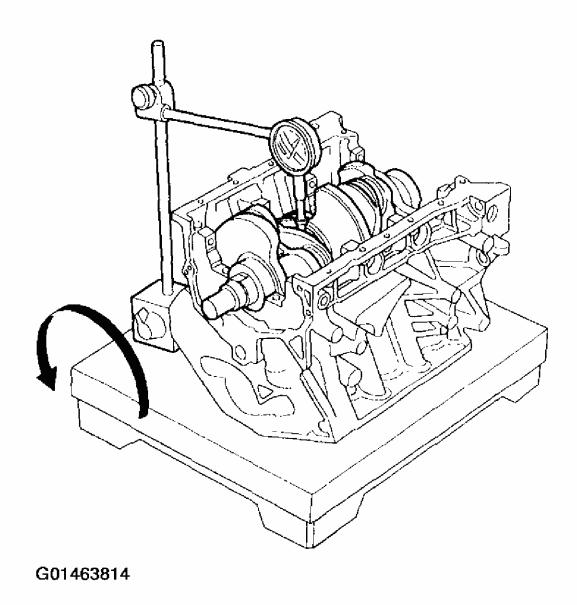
Measuring Crankshaft Total Runout Courtesy of AMERICAN HONDA MOTOR CO., INC.
